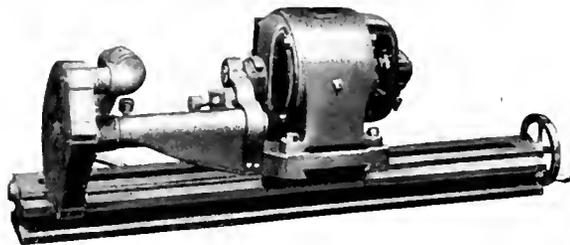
Commutator Grinding Tool, Consisting of Motor, Grinding Wheel, and Warp. Exhaust Shroud to take away Abrasive and Copper Dust Shown Around the Wheel
